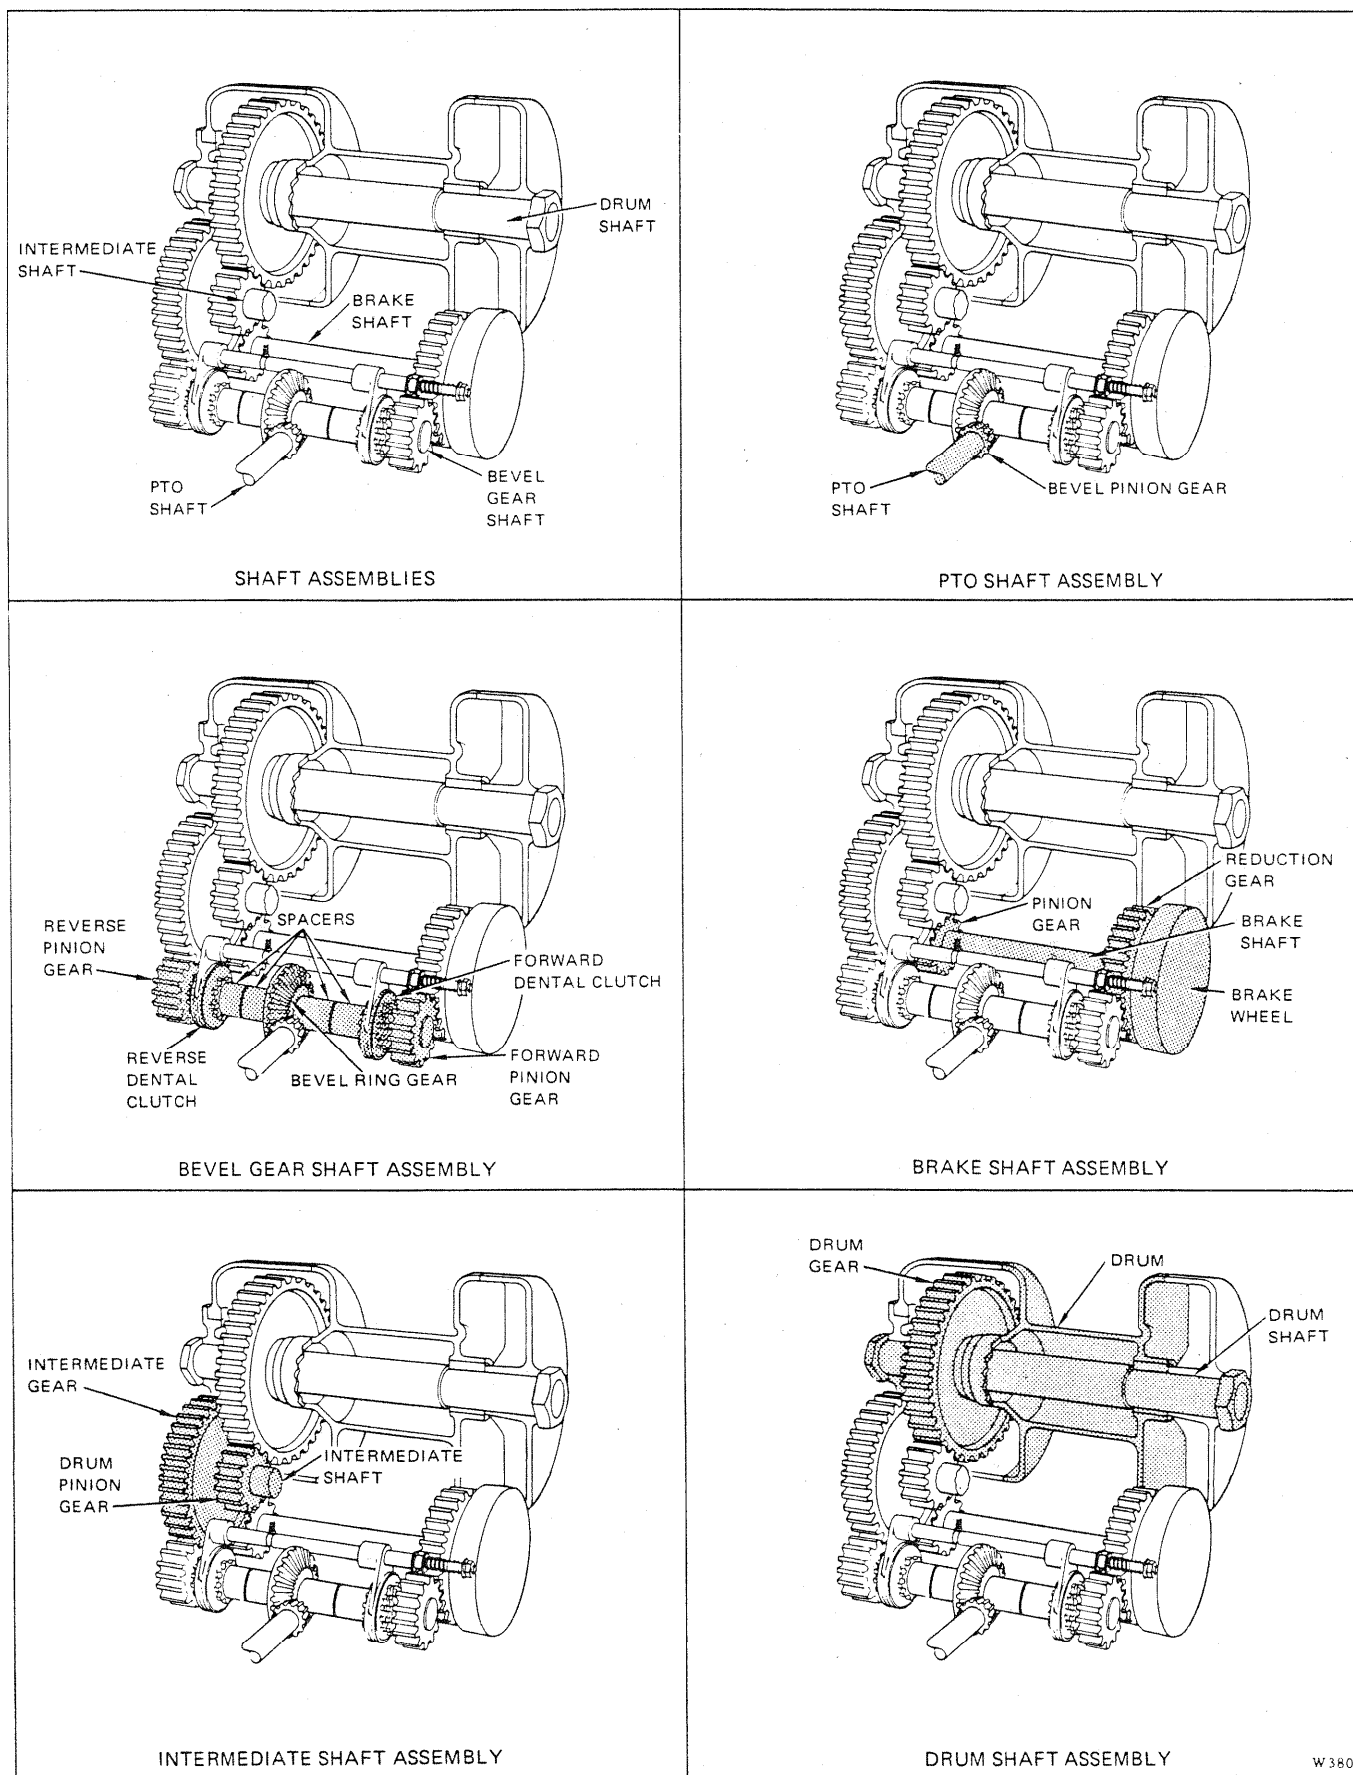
DIRECT DRIVE GEAR TRAIN
